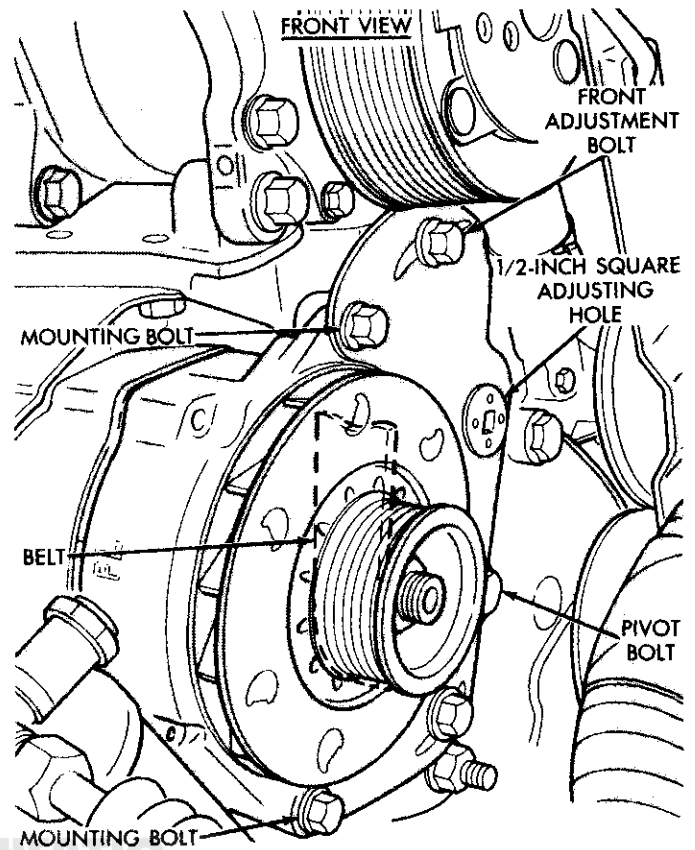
Serpentine Drive Belt Adjustment—4.2L
